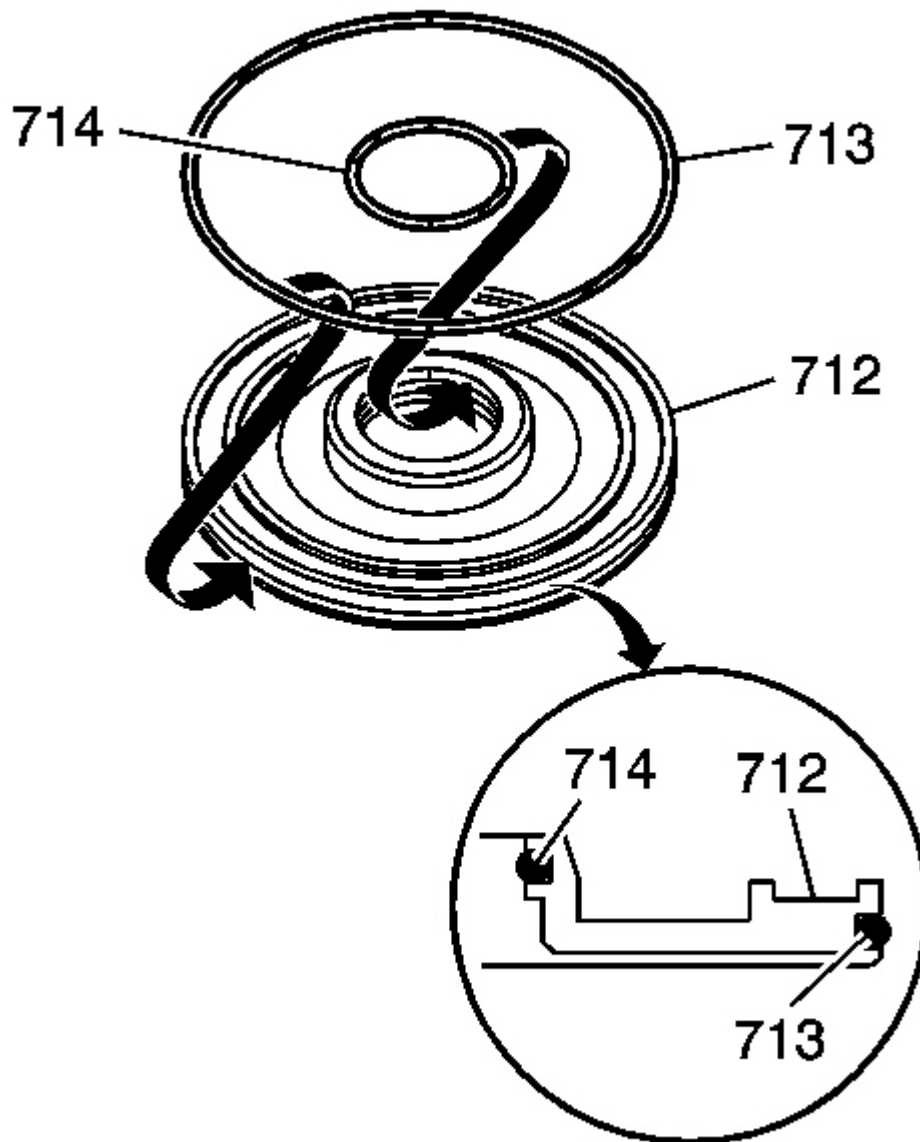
Installing O-Ring Seals In The Coast Clutch Piston
